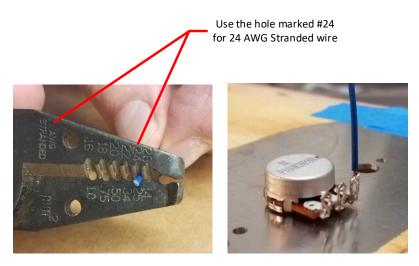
Use the hole marked "24" when stripping 24 AWG wire. When soldering the wires to the terminals of the pot make sure they come straight out as shown. Having a helper hold the wire while you solder it makes it MUCH easier to solder the wires.
